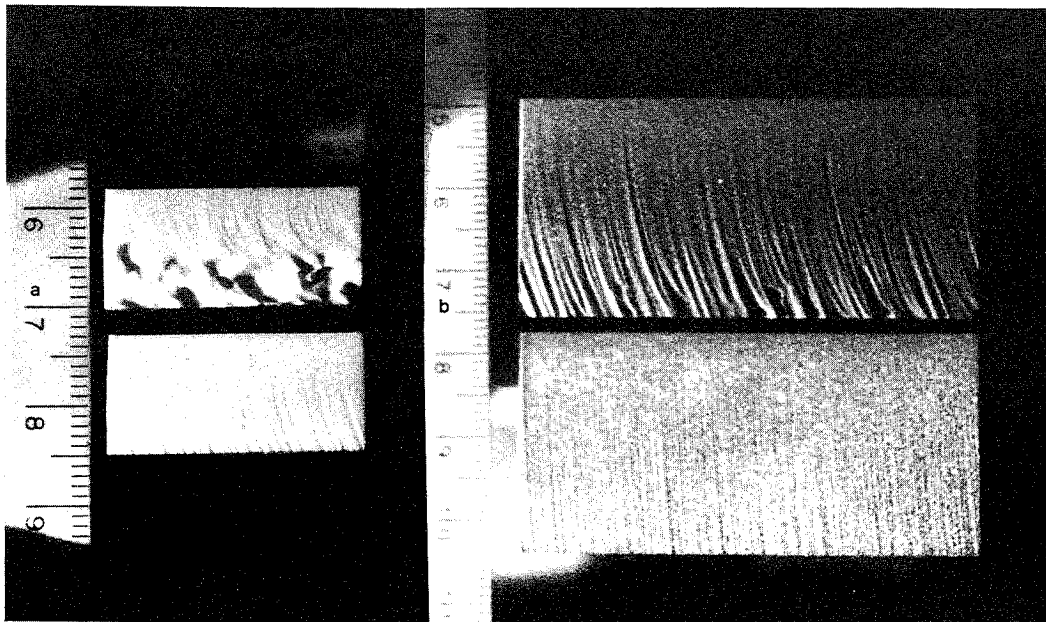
Cut surfaces of (a) AD 94 (left) and (b) steel (right) plates.
